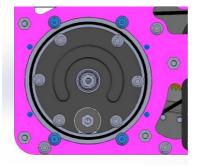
Top view of X-contact bearing fixed with 4 bolts highlighted in blue.
